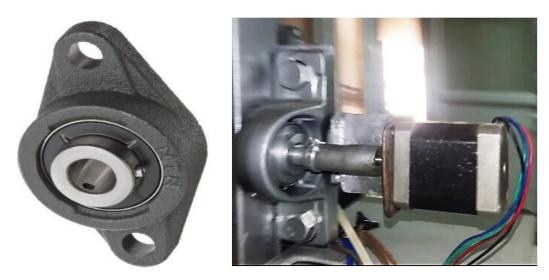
The roll bearings used to support the lead screws ends of the machine with stepper motor connecting coupling.
